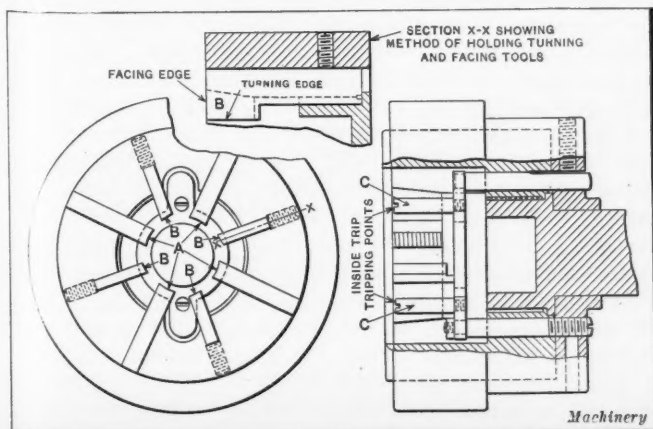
Combination Turning, Facing and Threading Tool for machining Piece shown in Fig. 7
